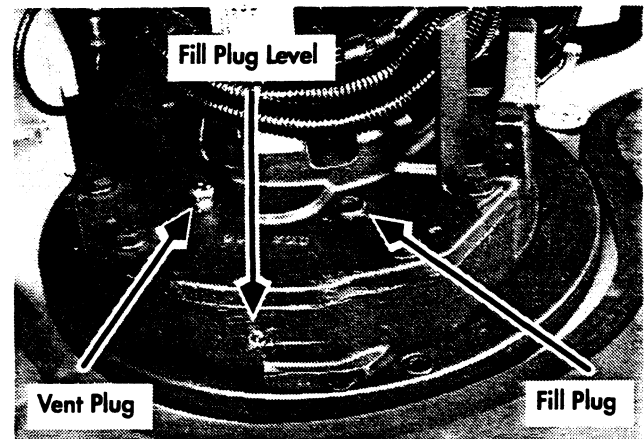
Drive Unit Fill Plug and Vent Plug
